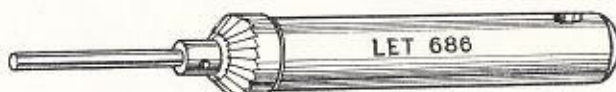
Service Tool No. LET 686. Valve Seat Cutting Tool.
